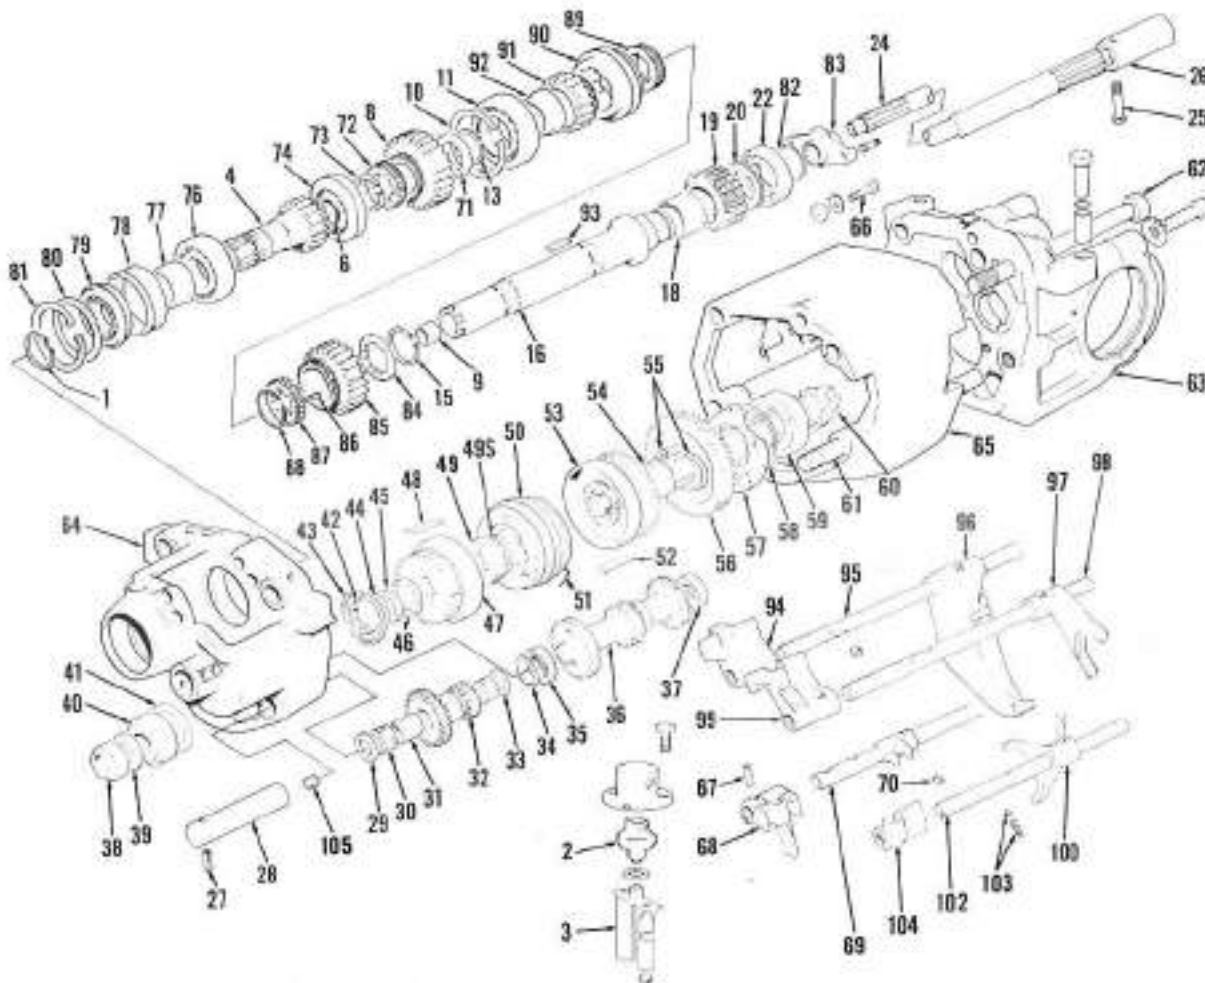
Exploded view of transmission gears, shafts and associated parts used for 1410 models. Refer also to Fig. 108 and 112.
